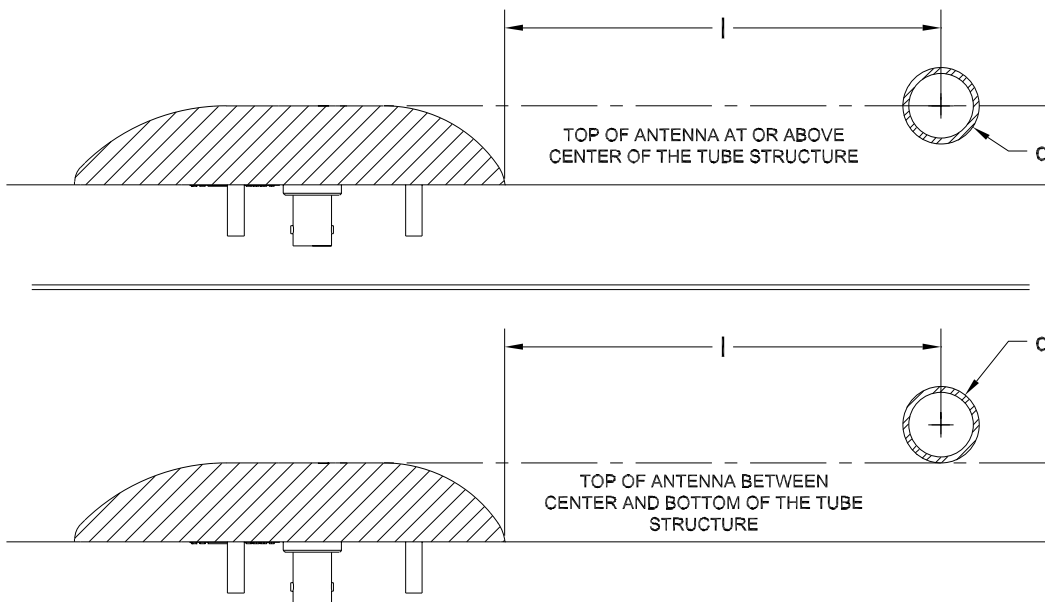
Example Teardrop Footprint Antenna Mounting Under Fabric Skin
